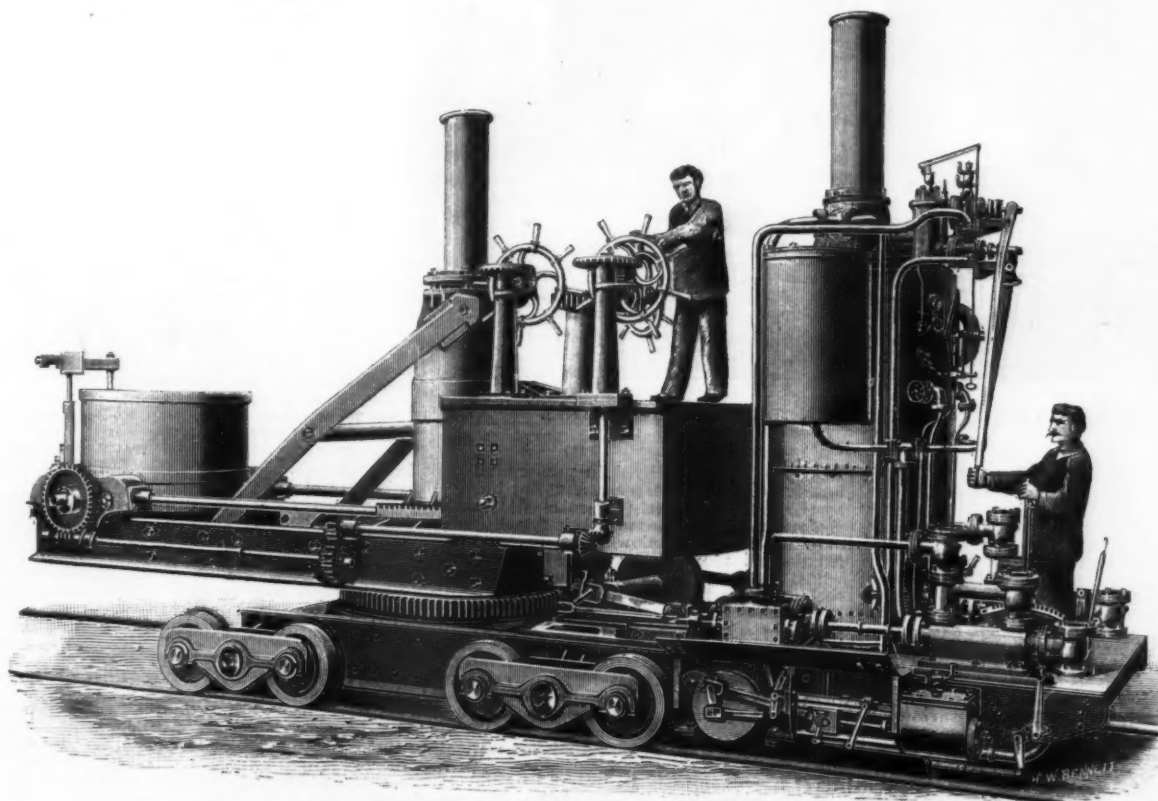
LADLE CRANE FOR STEEL WORKS.
